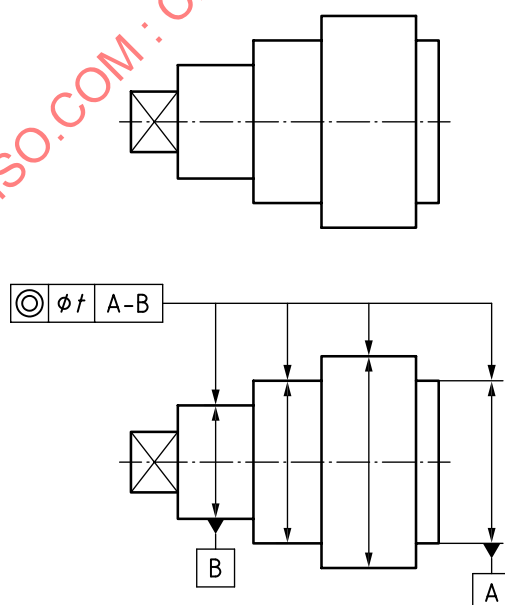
Drawing and meaning of general coaxiality tolerances, common datum
